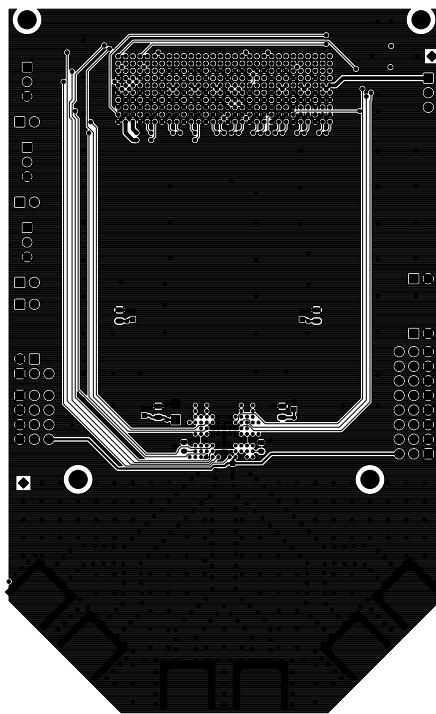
Si5110-EVB Layer 8—Solder Side (Daughter Card)
